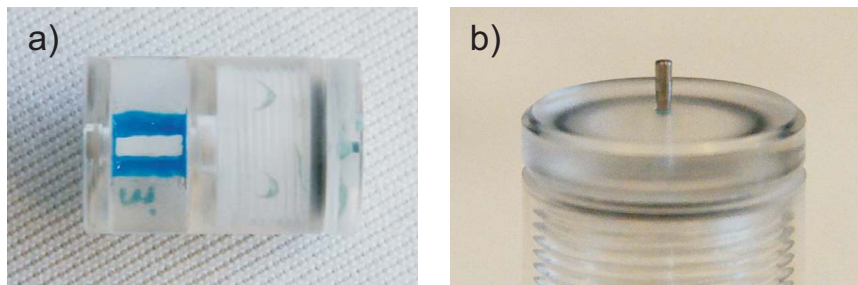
IGLUS demonstrator. a) assembled, b) the evacuation channel is sealed with a conically shaped pin.
